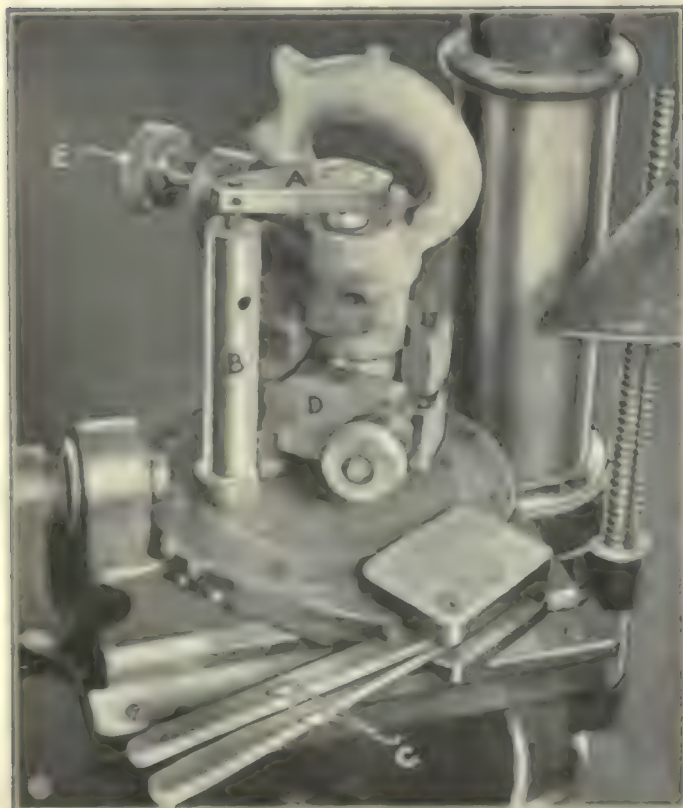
INDEXING JIG FOR DRILLING VALVE HEAD. FIG. 7—SAME OPERATION IN DIFFERENT POSITION
